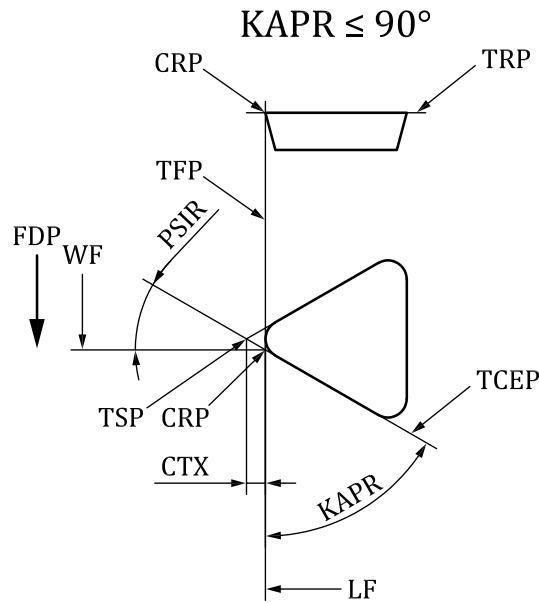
Feed direction perpendicular to tool axis — $KAPR \leq 90^\circ$
